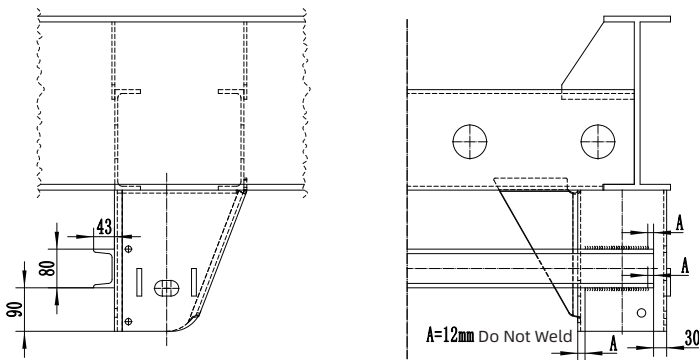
Bracket Welding Method at Frame Center (Wing-Type or Non-Wing Type)
